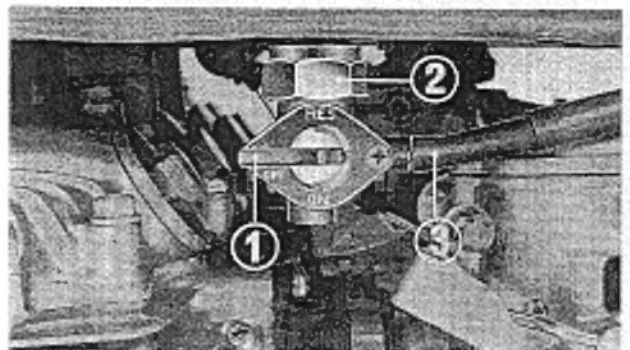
① Fuel cock lever ③ Fuel tube
